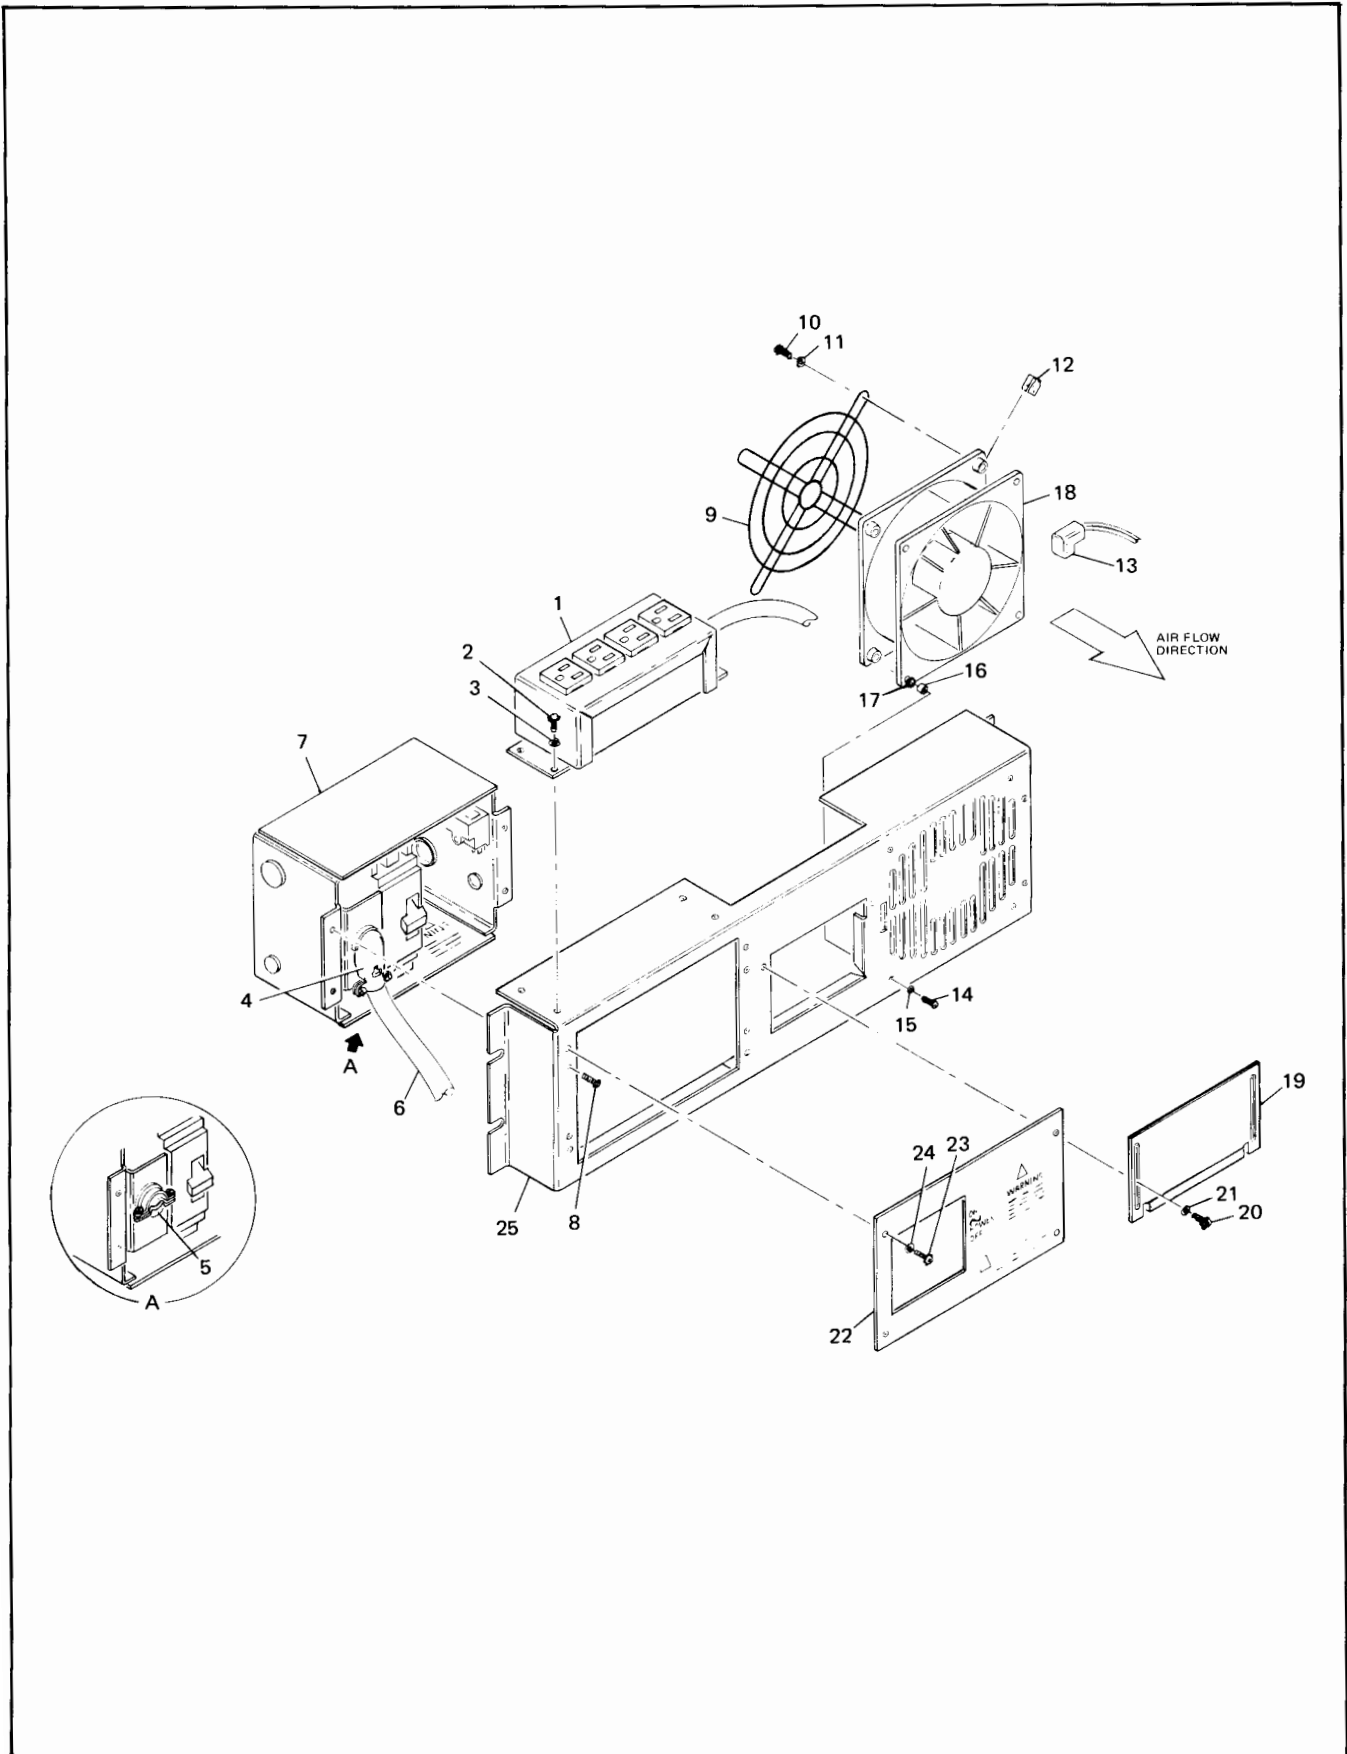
Power Panel Assembly (Part no. 02940-60156 and 02940-60157), Exploded View
